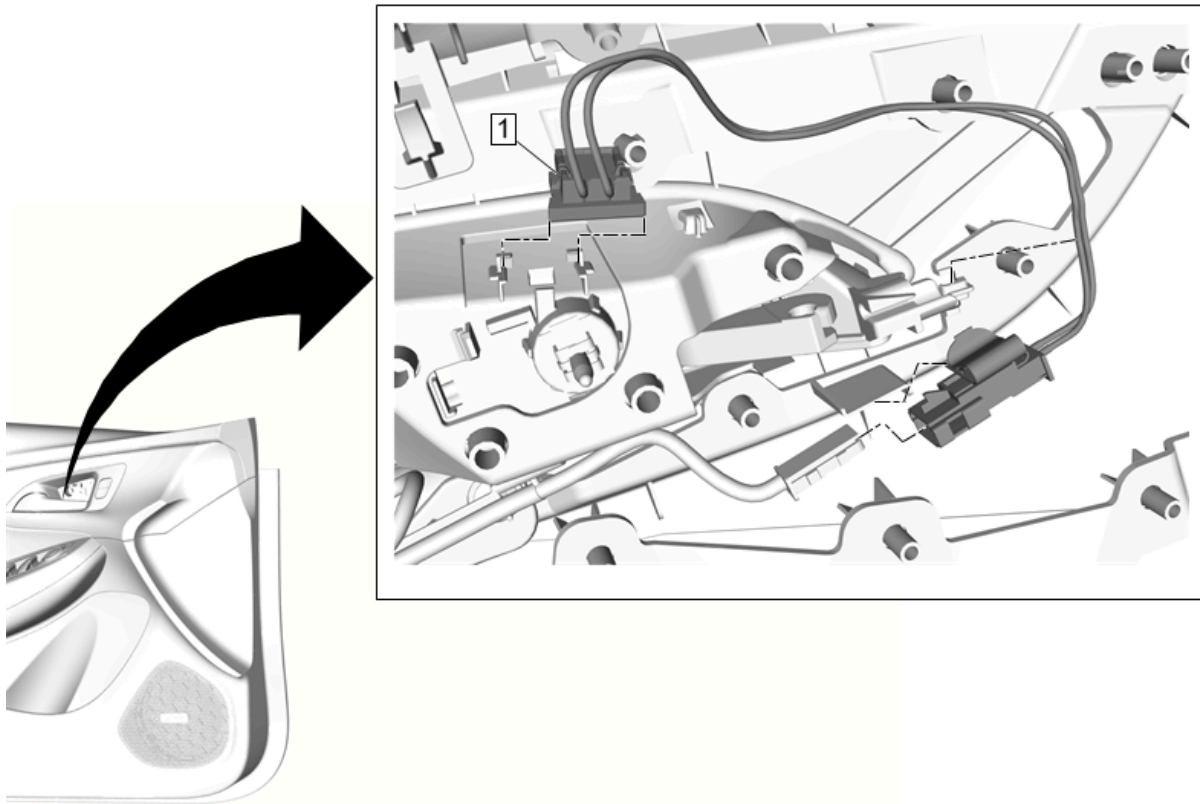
Front Side Door Inside Handle Illumination Lamp
